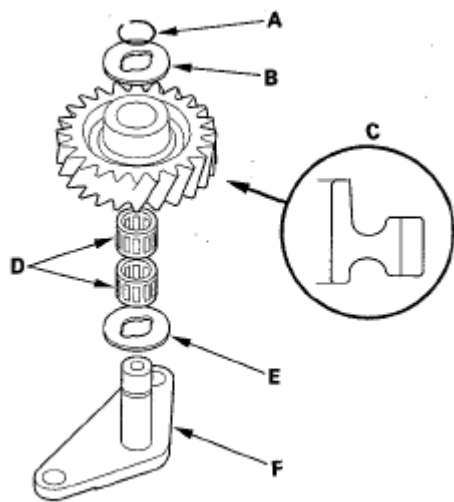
Identifying Thrust Washer, Reverse Idler Gear, Needle Bearings And Thrust Washer
